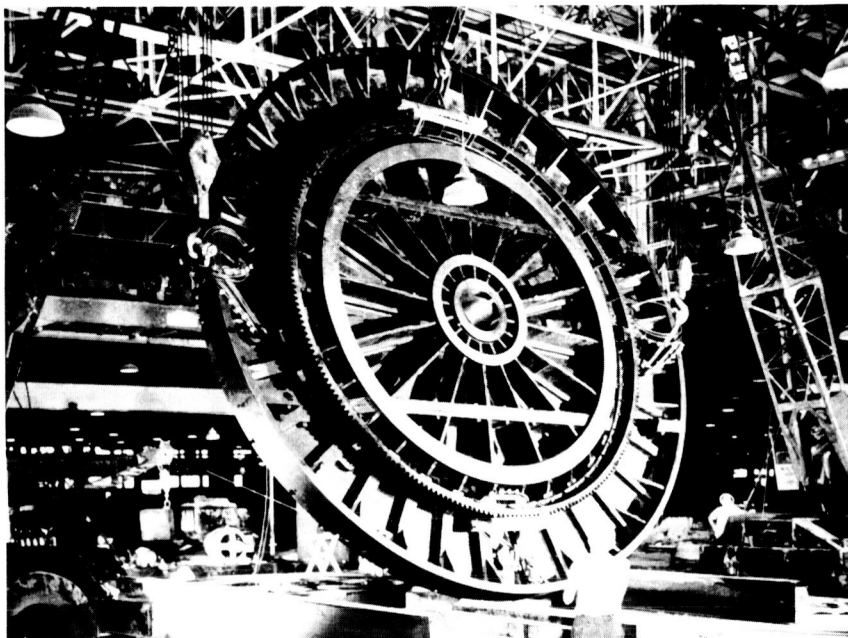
INSTALLATION OF 42-FOOT BORING MILL
